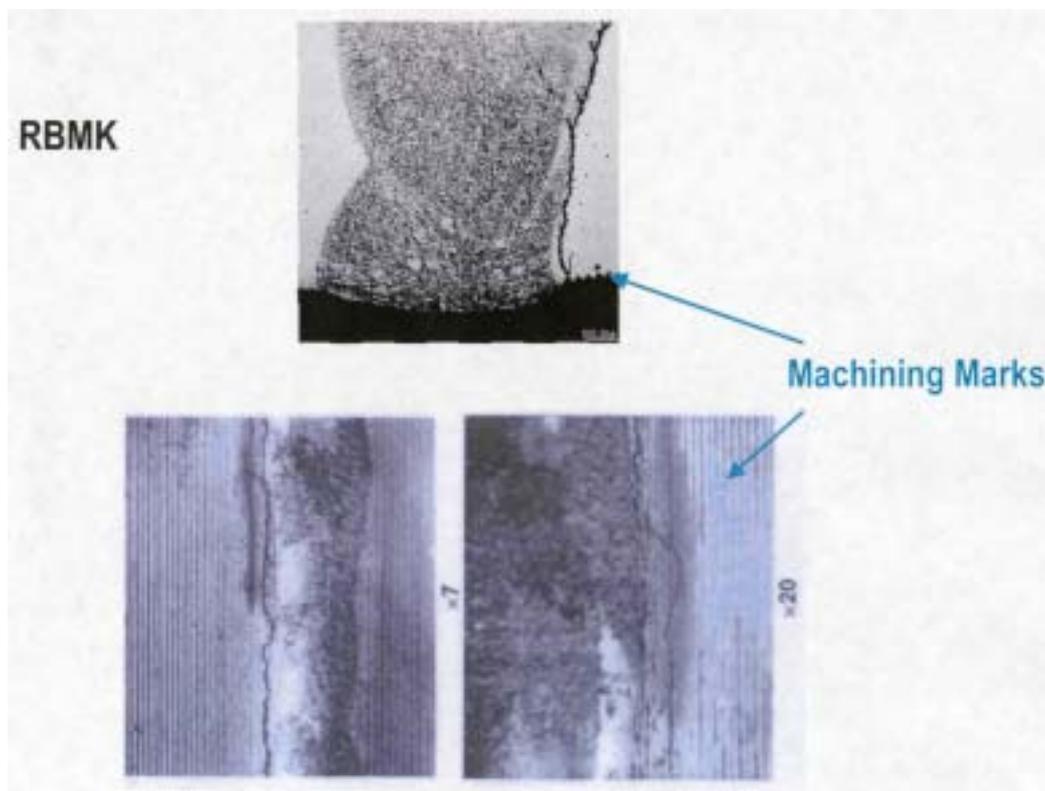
Pipe weld with IGSCC showing machining marks that might have served as crevices or stress concentrations.
